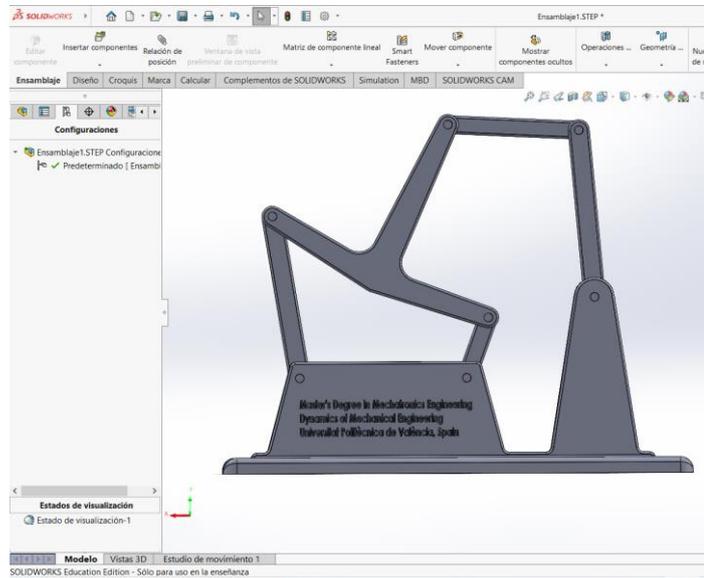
SolidWorks assembly of an Artobolevski's mechanism.
